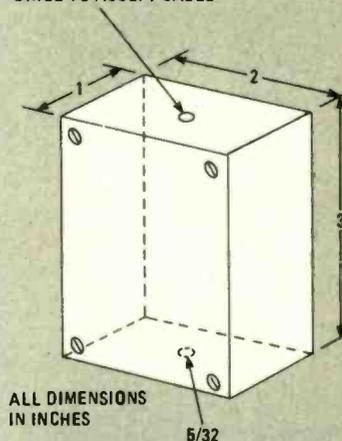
THE AIR TEMPERATURE sensor is mounted in a box with these dimensions and mounted outdoors.
